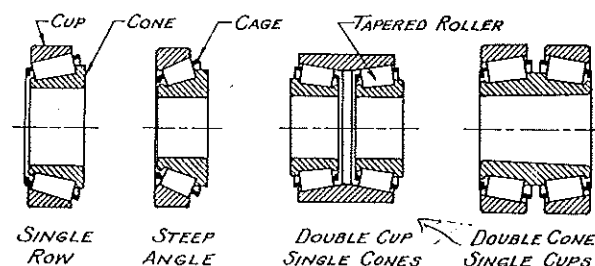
Roller bearing mountings. Courtesy Timken Roller Bearing Co.
